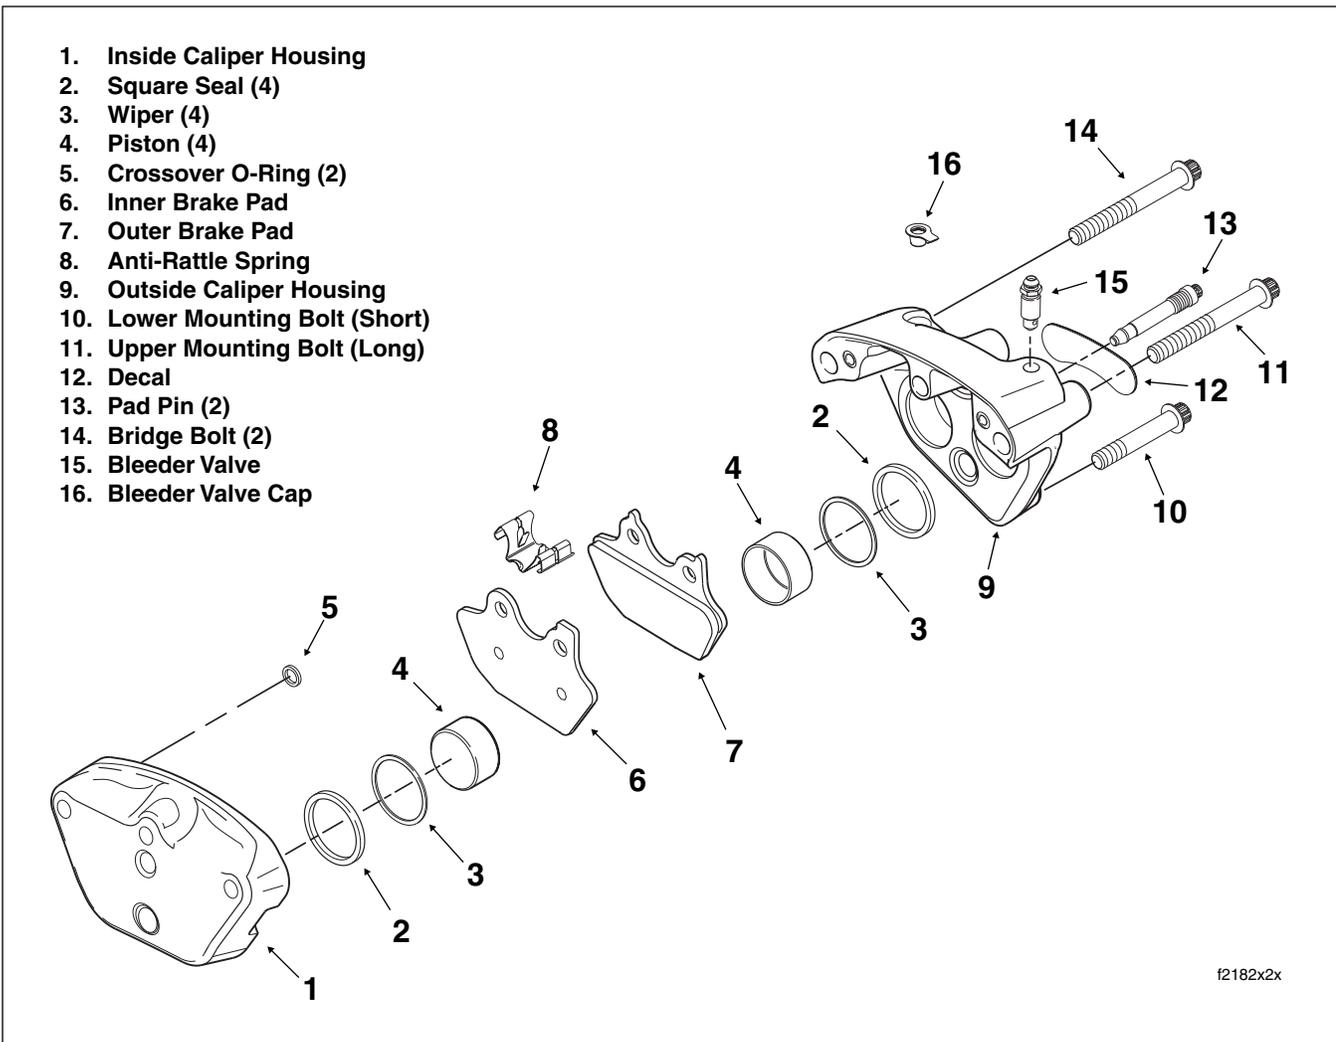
Front Brake Caliper Assembly (Left Side)
